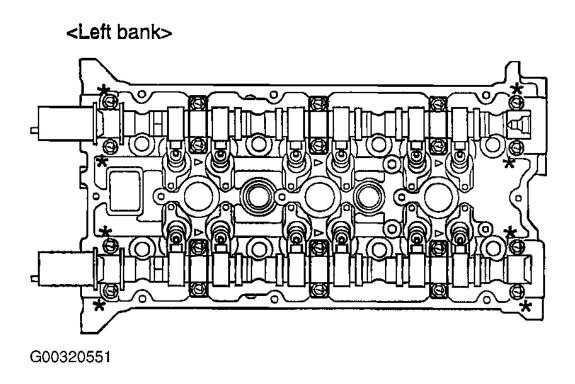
Locating Bearing Cap Positions Courtesy of KIA MOTORS AMERICA, INC.
